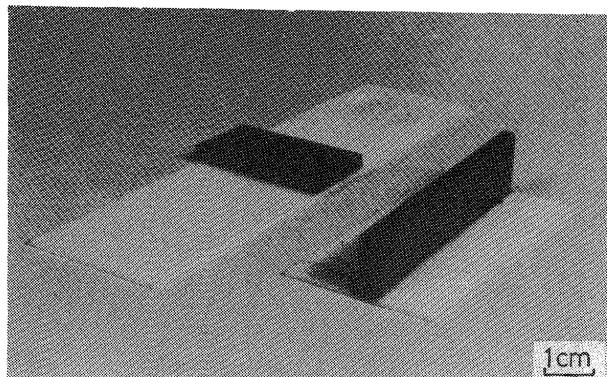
Al_2O_3 /Steel brazed samples with copper filler metal. (1) alumina butt joint strapped with steel, (2) alumina/steel tee joint.
